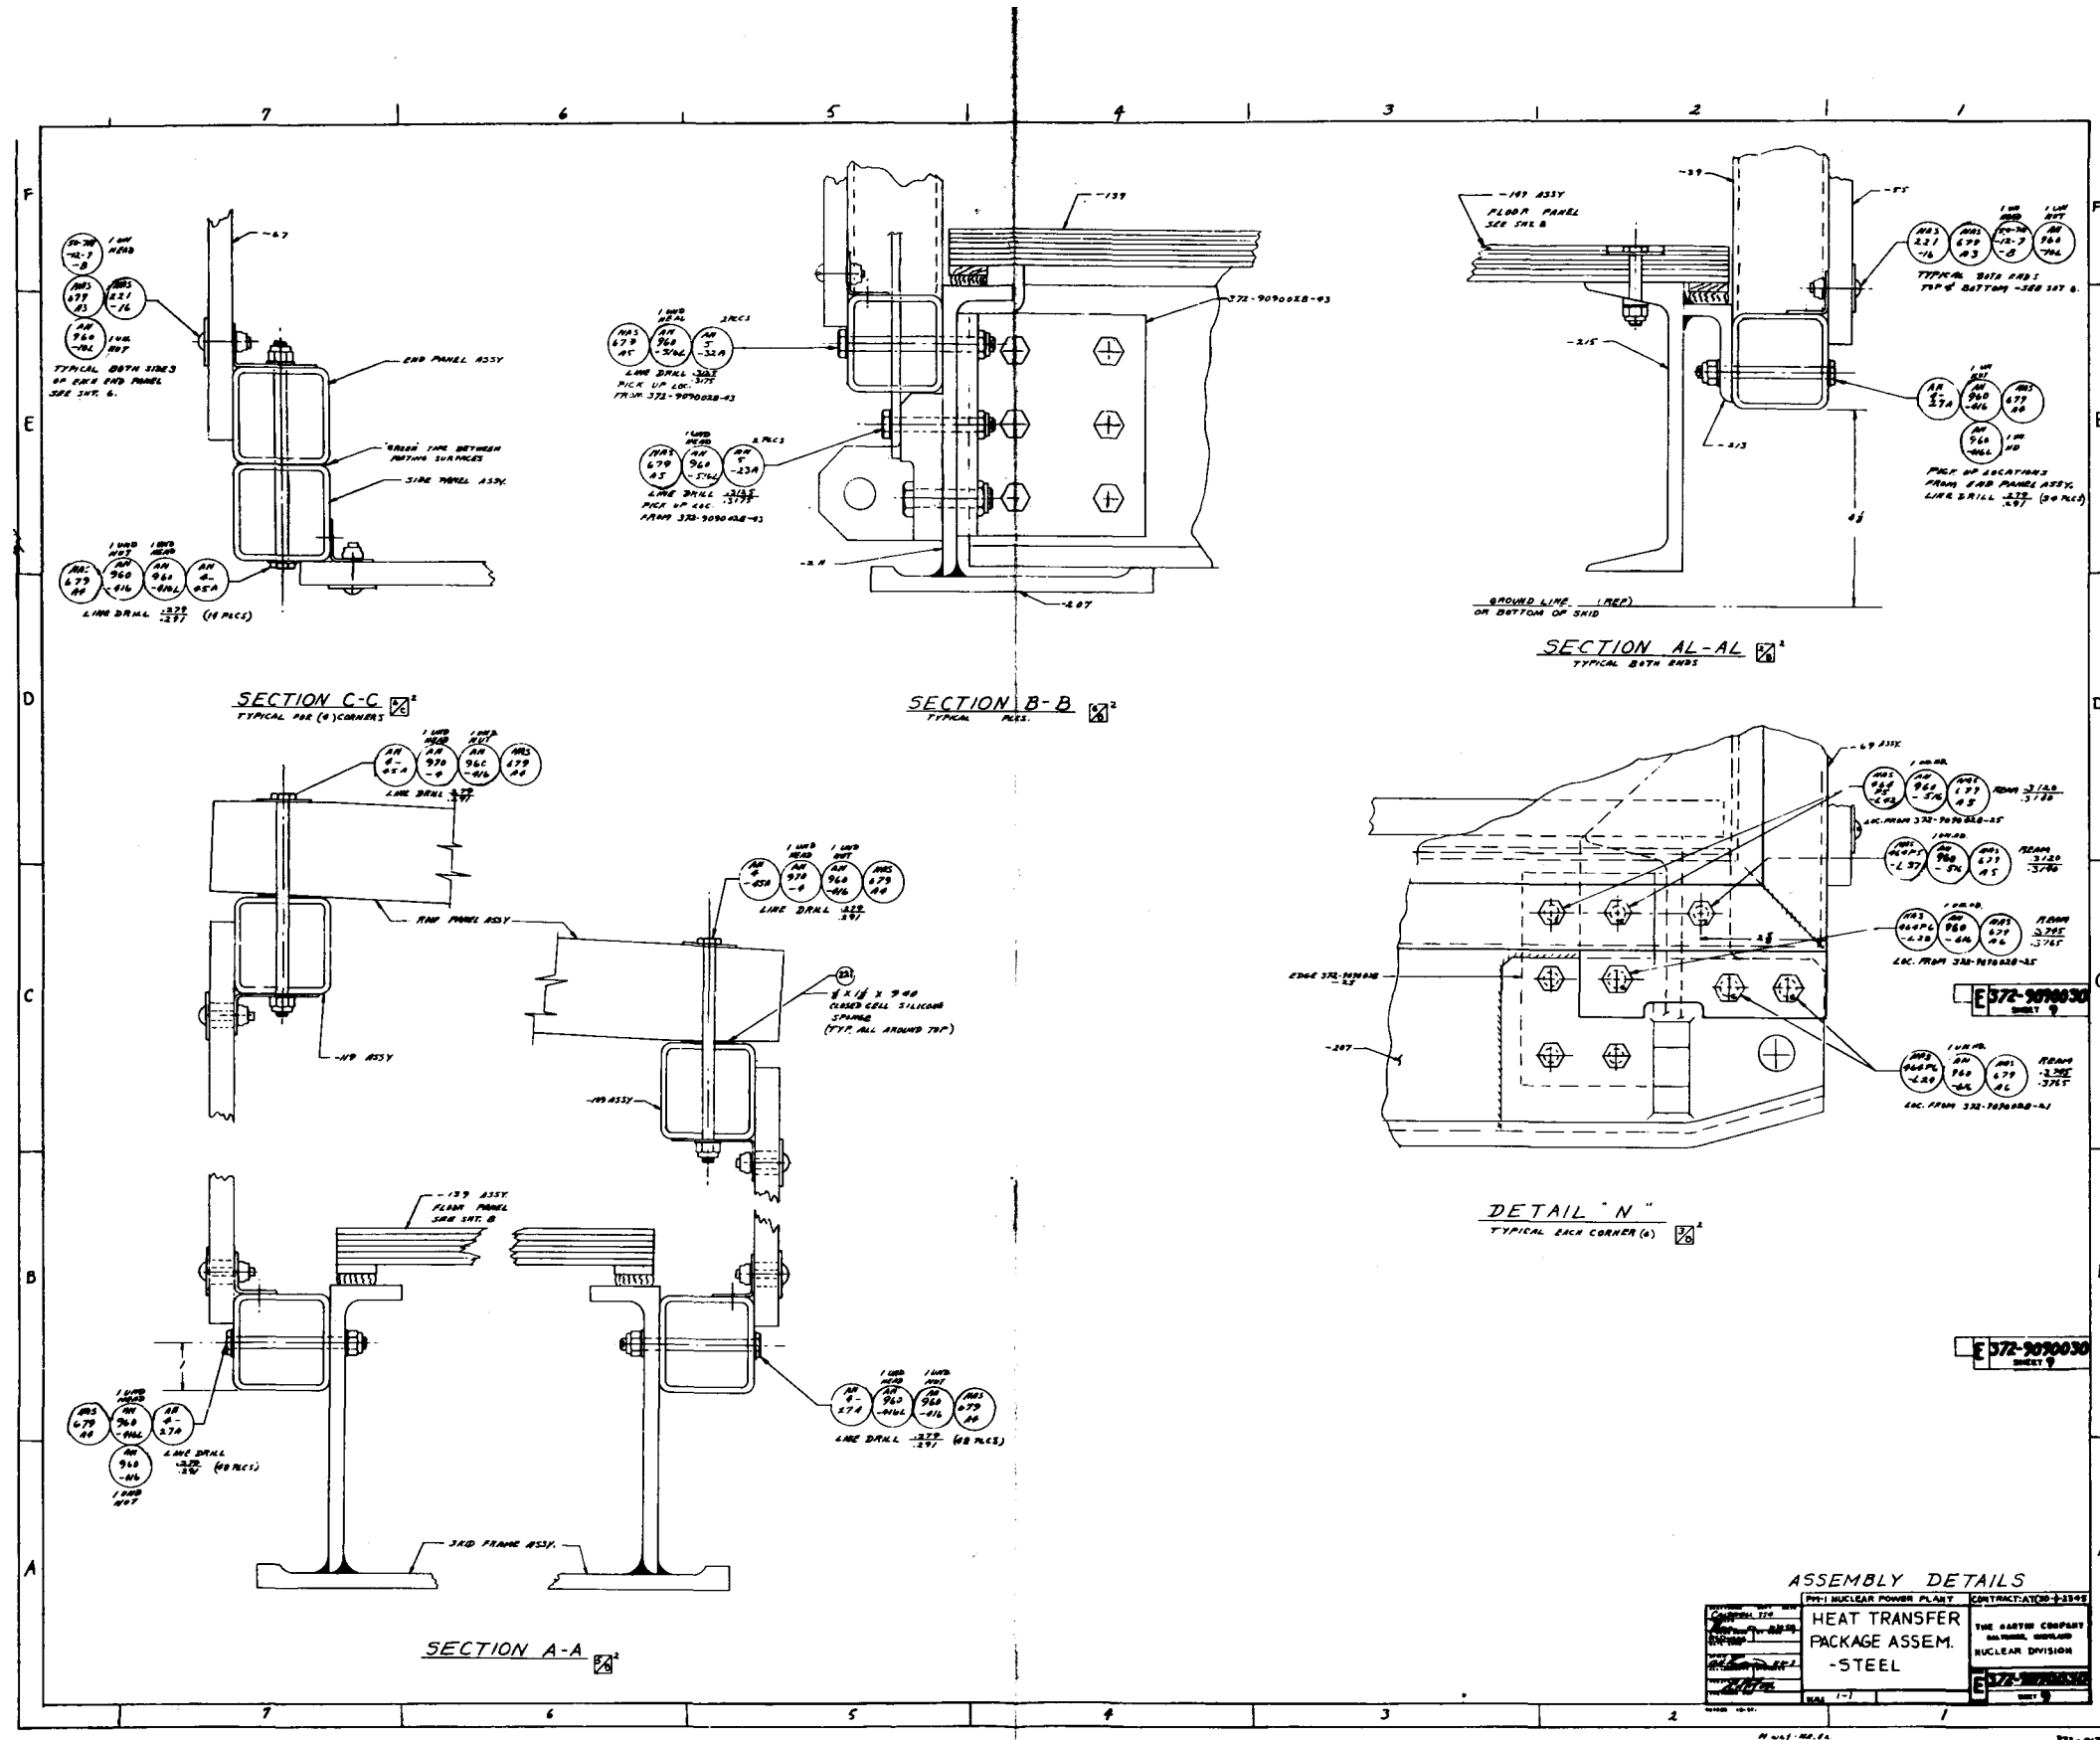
Heat Transfer Package Assembly Drawing (Assembly Details)
